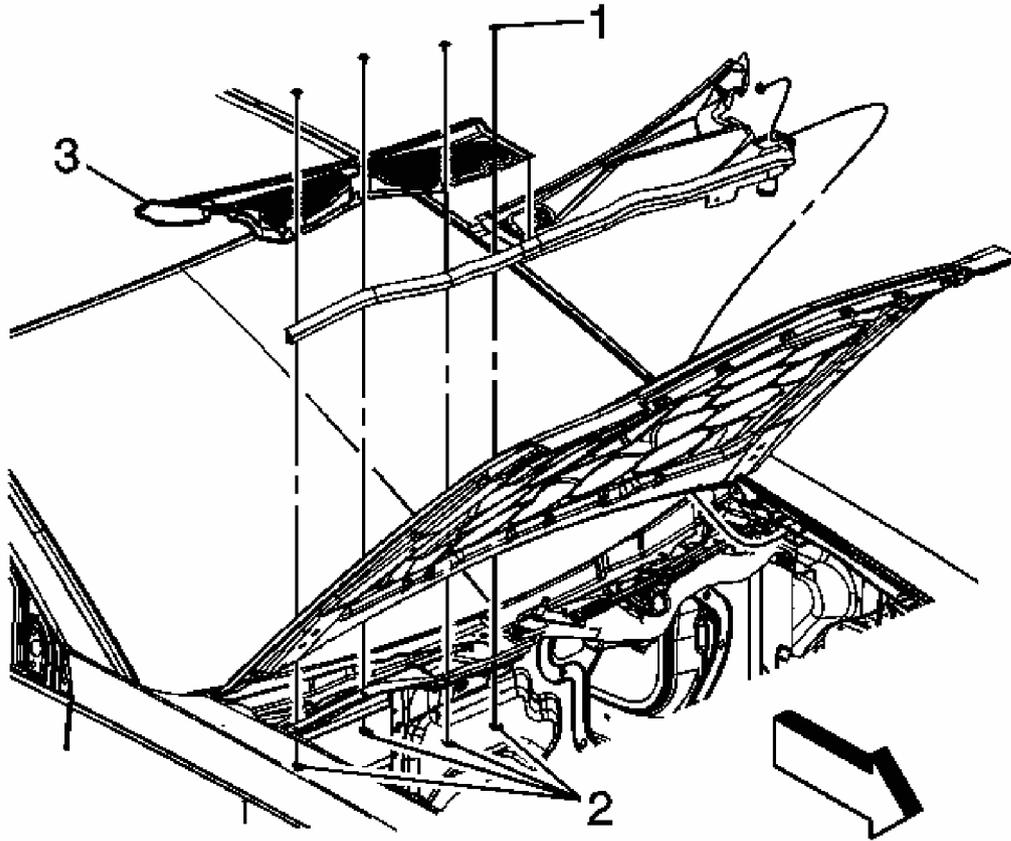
Removing & Installing Hood Seal & Passenger Side Air Inlet Screen Panel
